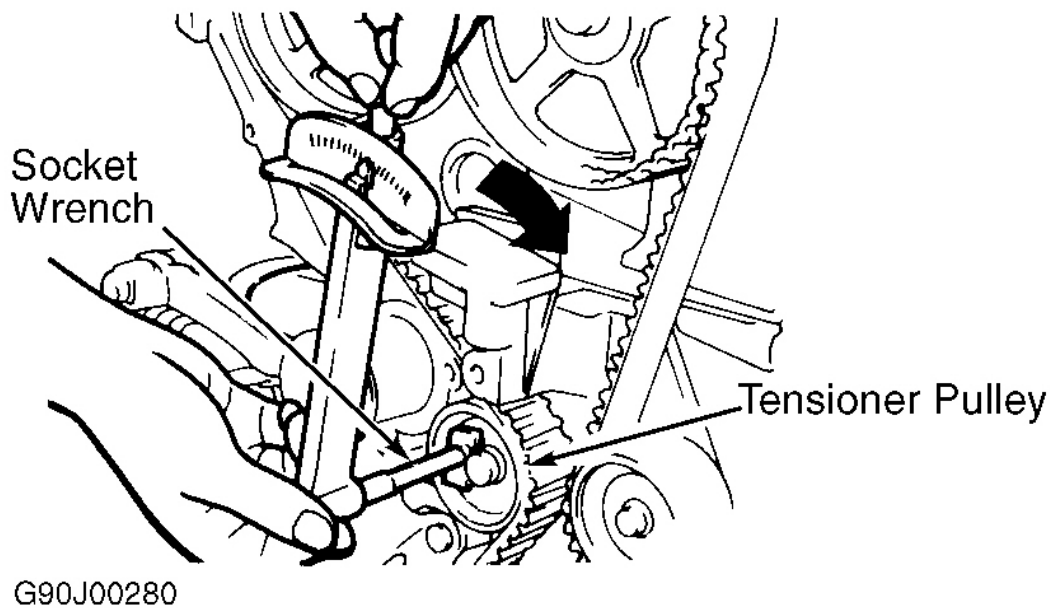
Adjusting Timing Belt Tensioner Pulley (DOHC Shown; SOHC Similar)
